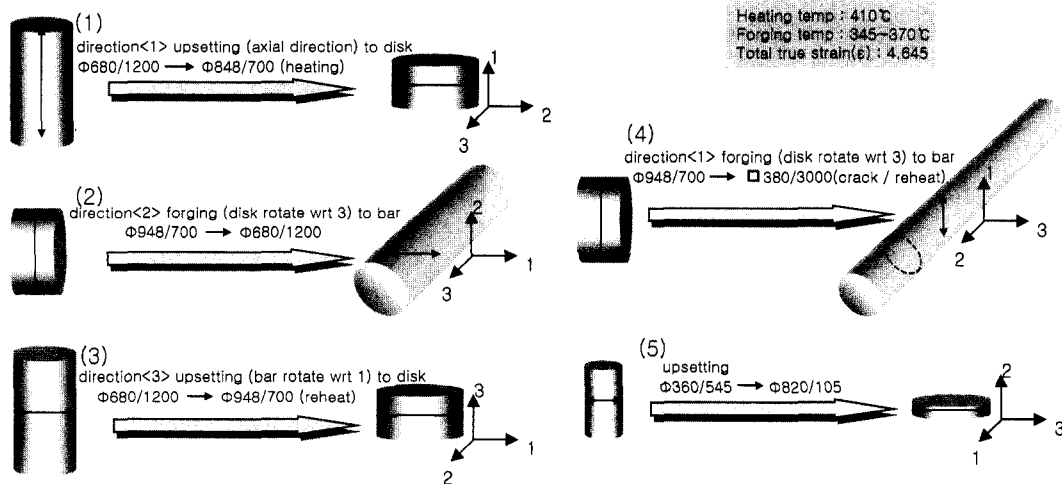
Schematic drawing of billet making sequence of multi-axial forging (MF).
